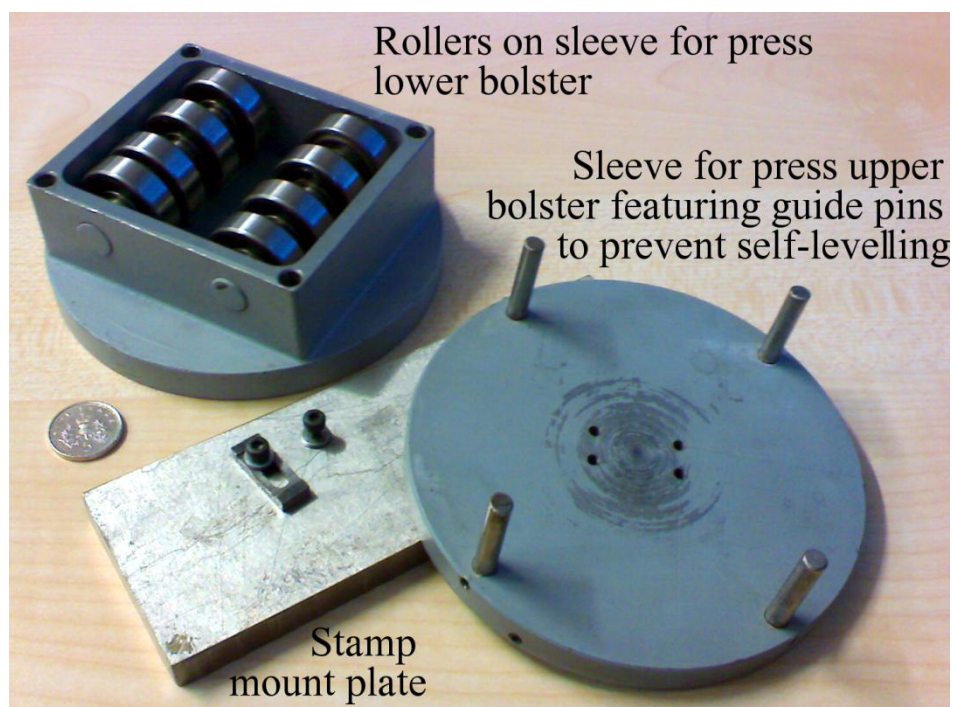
Annotated photograph of the custom built roller bearing housing upon a sleeve for the Specac Ltd press lower bolster. The photograph also features a sleeve for the upper bolster which is held on with grub screws and features guide rails which slot in to corresponding holes on the roller box to disable the press self-levelling mechanism. A steel plate is also shown which would be situated between the roller bearings and the titanium sample to act as a planar surface for mounting a stamp which may exhibit linear movement when manually pulled or pushed across the bearings. A five pence British sterling coin is shown for scale.
